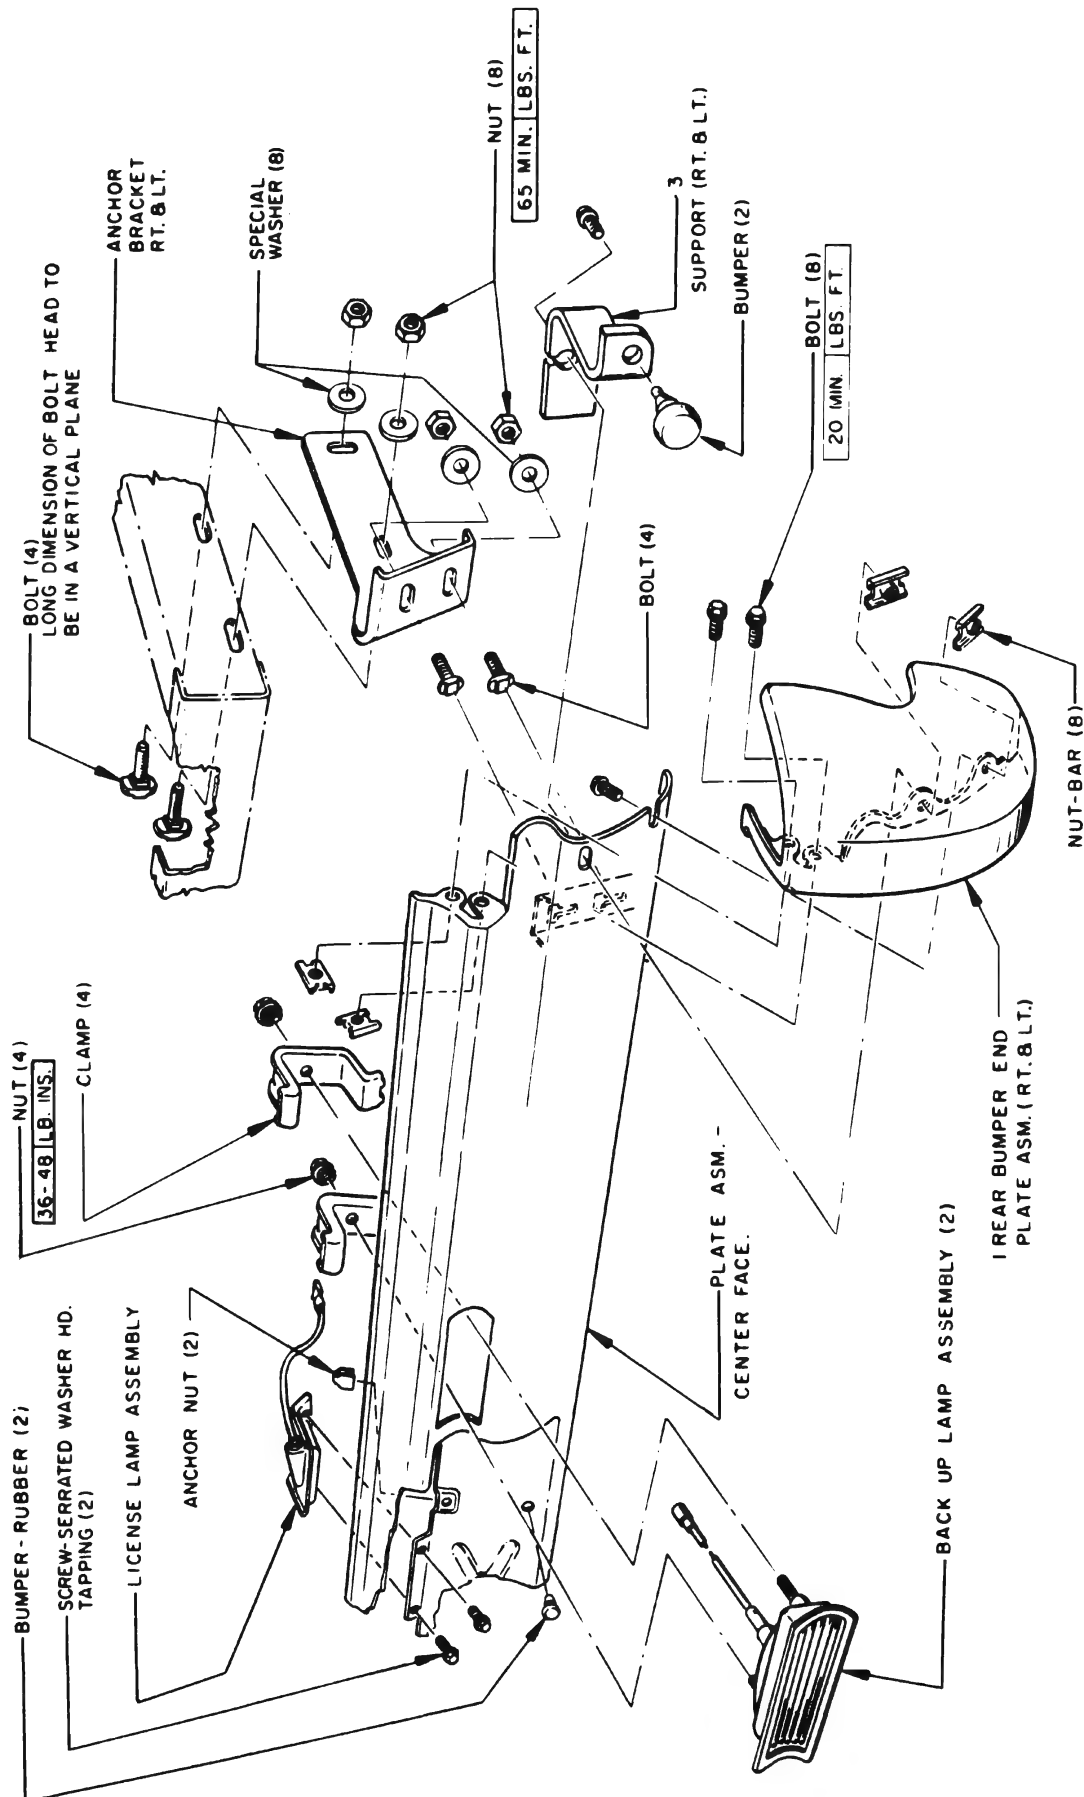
Rear Bumper & Back Up Light Installation—4800 Series
